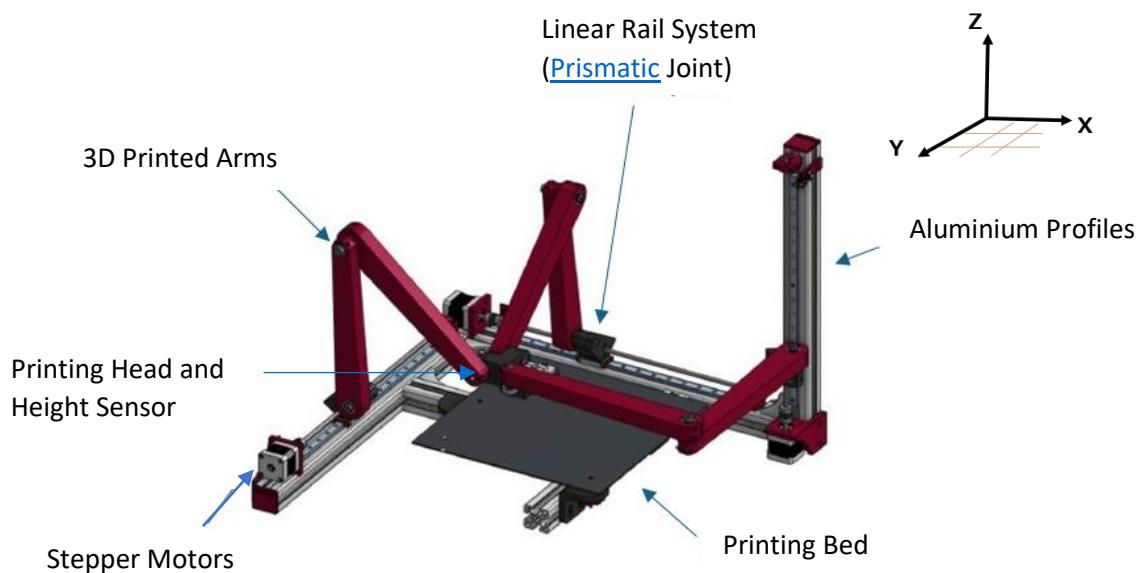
The Tripteron 3D Printer - CAD Model [2]
